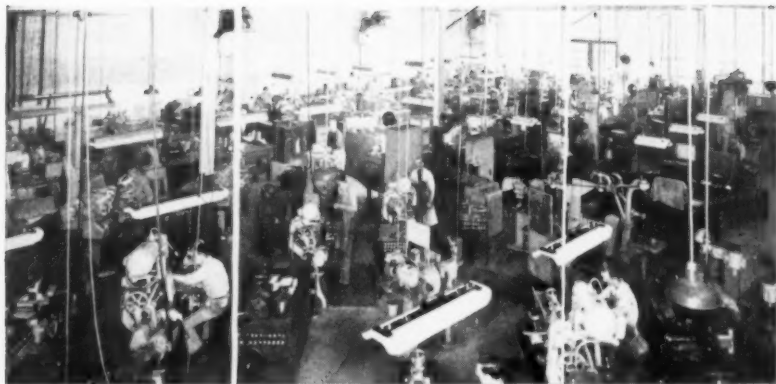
A general view of the tool room at the Gardner-Denver Co. The tool room maintains 75 men, operating the latest equipment. The tool room has a separate carbide department for the repair of milling, turning and boring tools.
